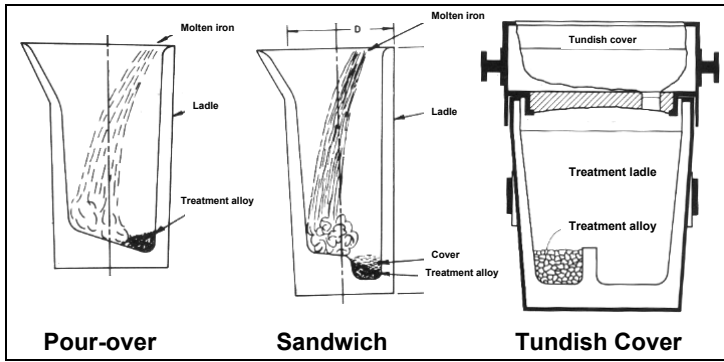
Examples of overpour, sandwich and tundish cover ladles.
